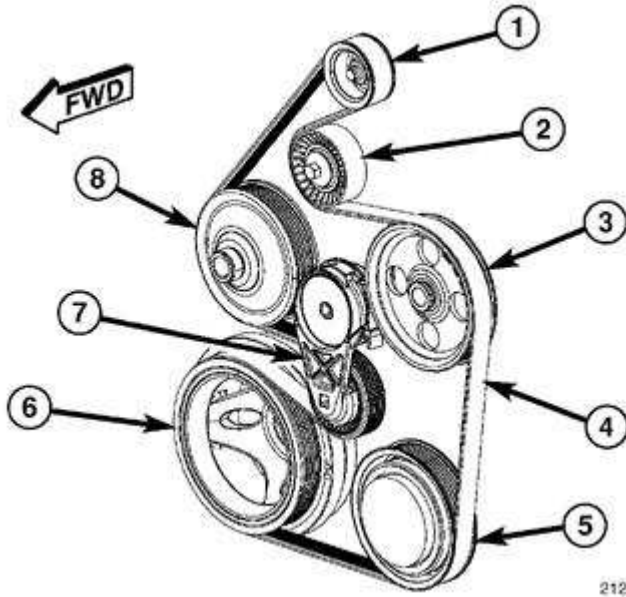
Identifying Accessory Drive Belt Routing - 5.7L
